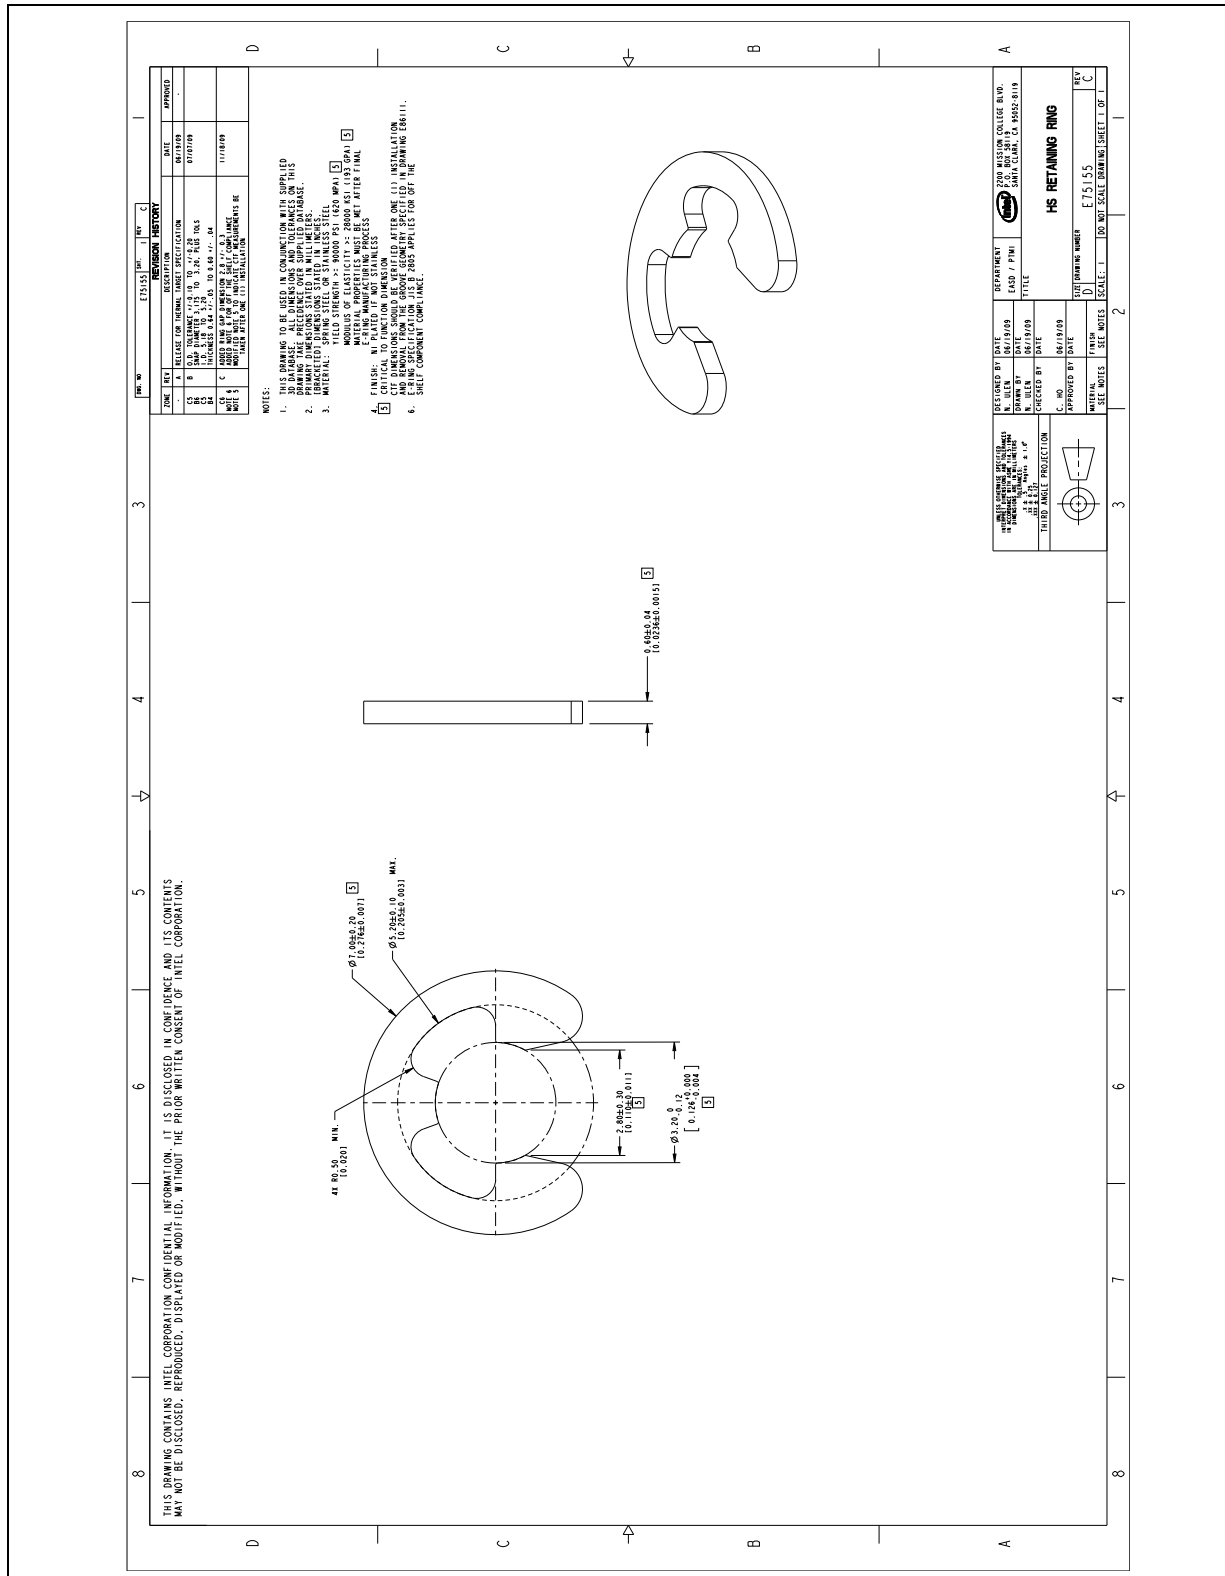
Processor Heatsink Retaining Ring Mechanical Drawing - E75155 Rev C
